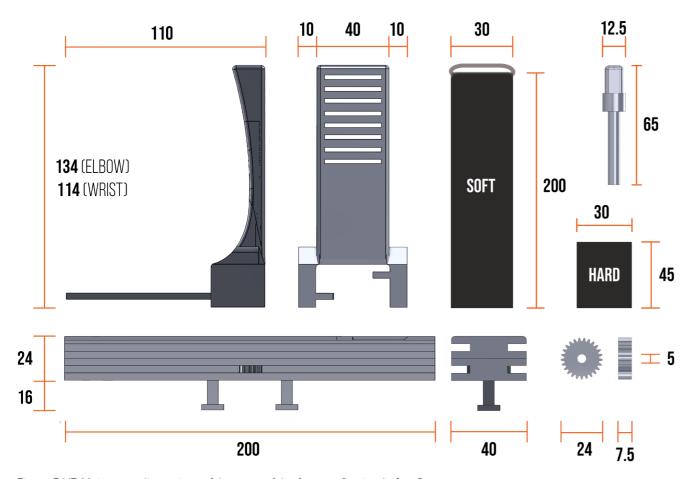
Main outer dimensions of the parts of the forearm fixation (in [mm]).
